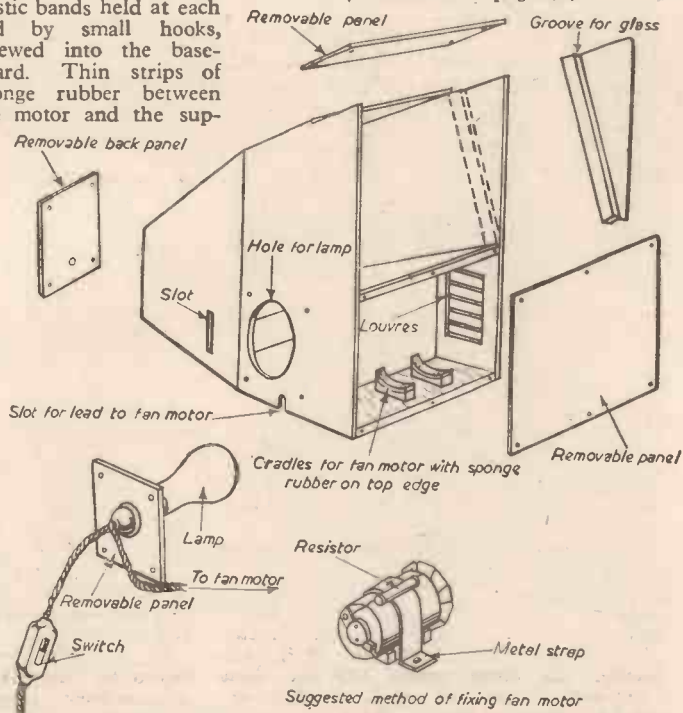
Details of the glass screen, motor fixing and lamp mounting.
